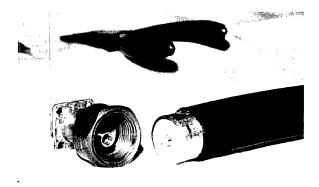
The completed connector and the prepared end of the hardline, ready for assembly.
